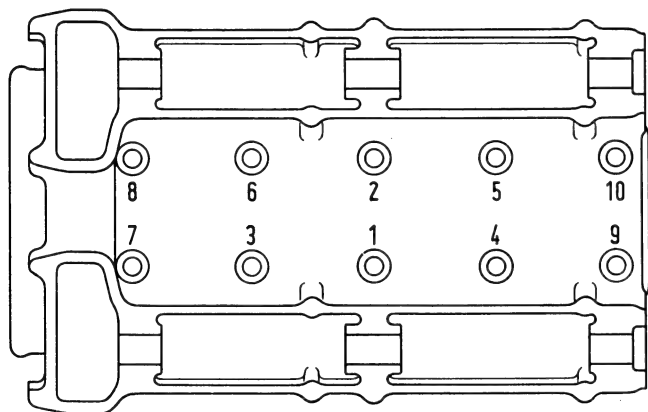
118 B.000 engine head hold-down screw tightening sequence.
